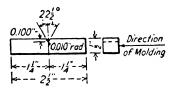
Cantilever beam (Izod) impact test specimen.
